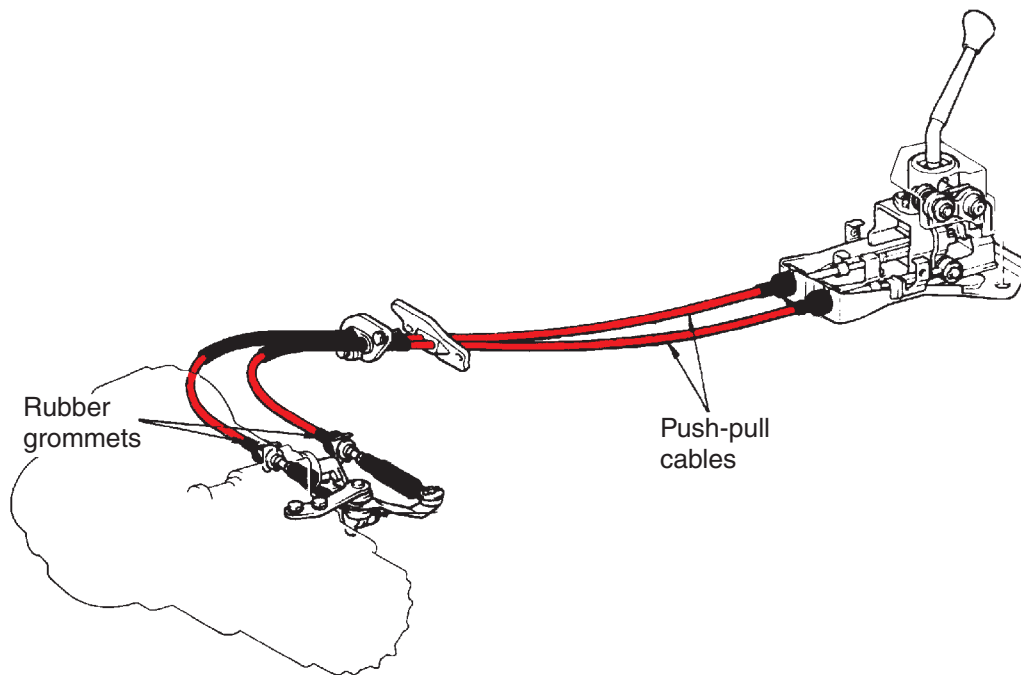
A cable-type external gearshift linkage used in a transaxle application.
